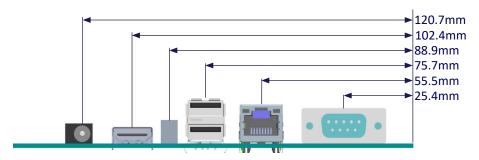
External I/O dimensions of the VIA VAB-935 carrier board (back panel)
